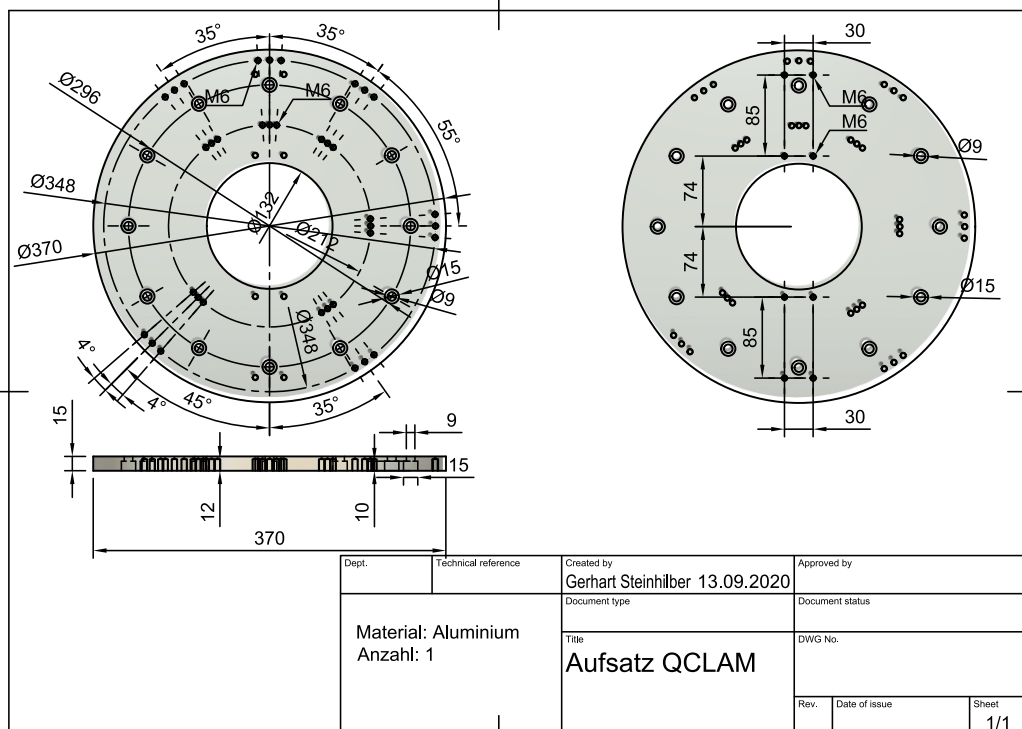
Technical drawing of the attachment for the rotation center of the QCLAM spectrometer.
